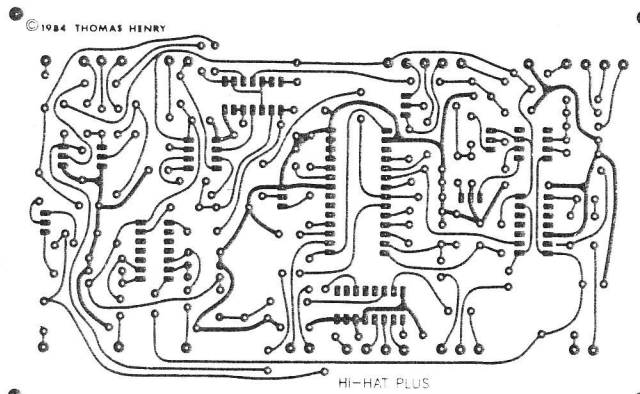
CIRCUIT BOARD FOIL PATTERN
